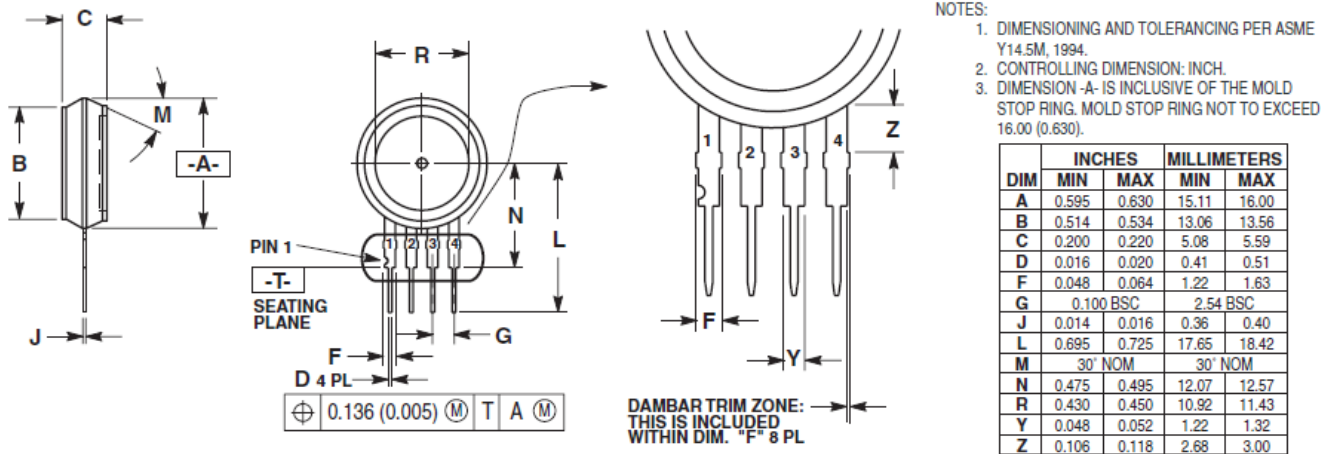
CASE 344B-01 ISSUE B UNIBODY PACKAGE
